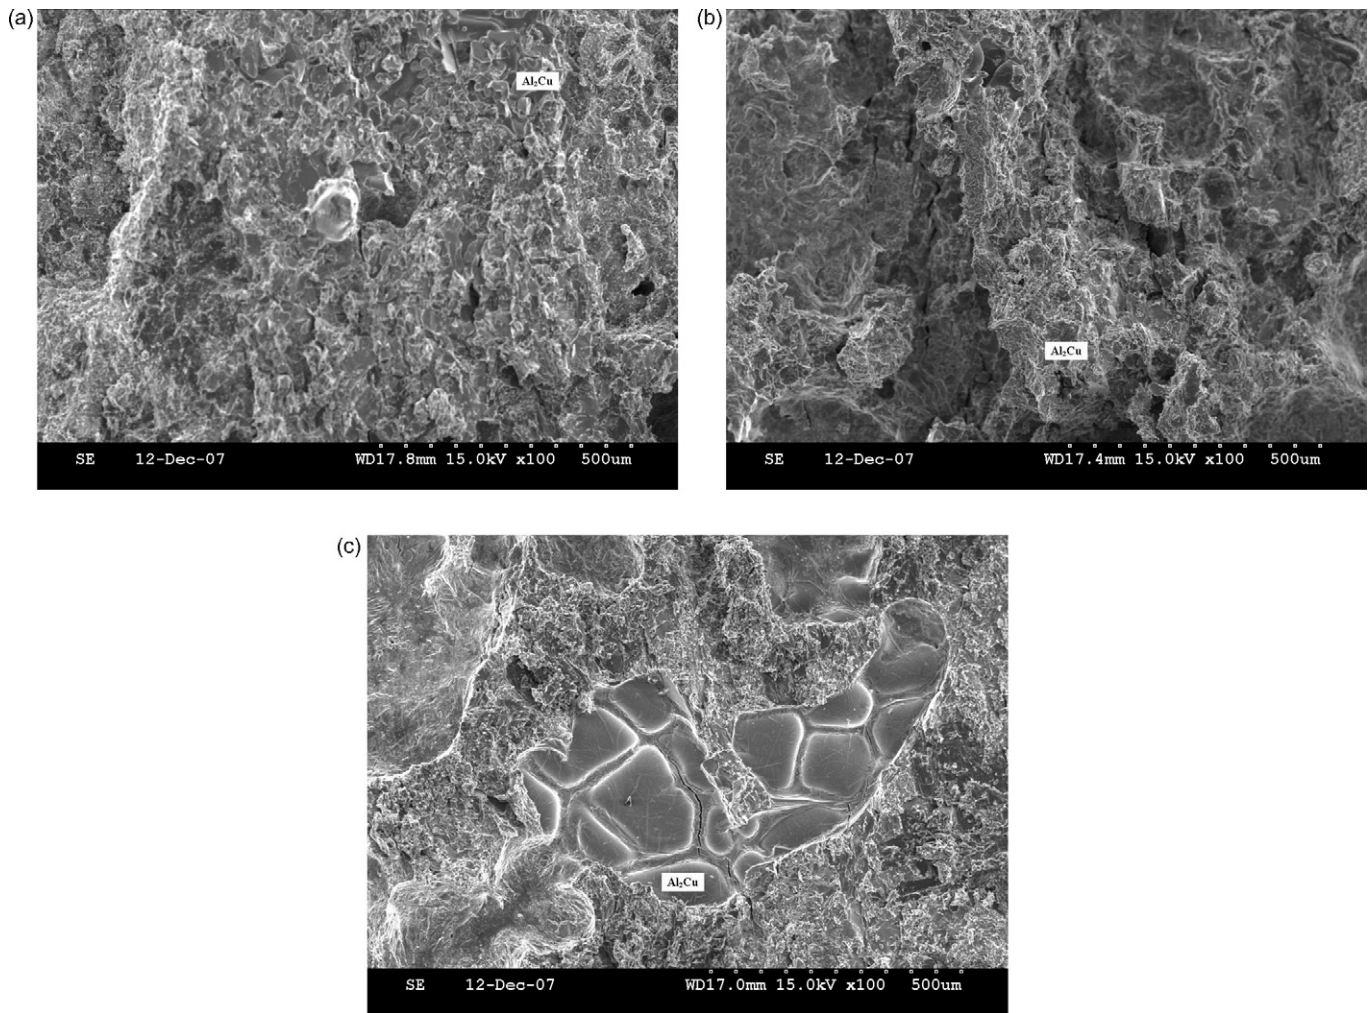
Fractographs of the 6061 aluminum alloy joints bonded with Al-9.6Si-20Cu filler metal at 560 °C for (a) 10 min, (b) 30 min, and (c) 60 min.
